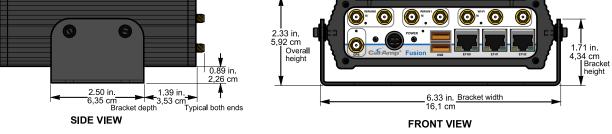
Fusion with mobile mounting bracket for abovesurface mounting
